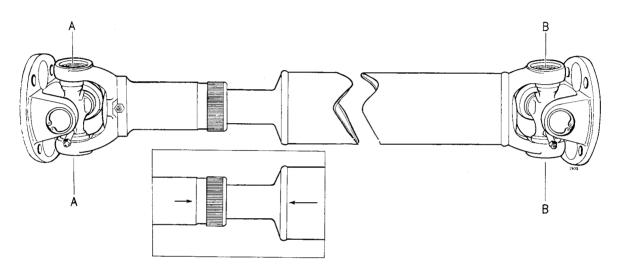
When refitting the sliding joint to the drive shaft it is ESSENTIAL that the yokes A and B are in the same plane. The inset shows the arrows that are stamped on the two parts to facilitate alignment.
